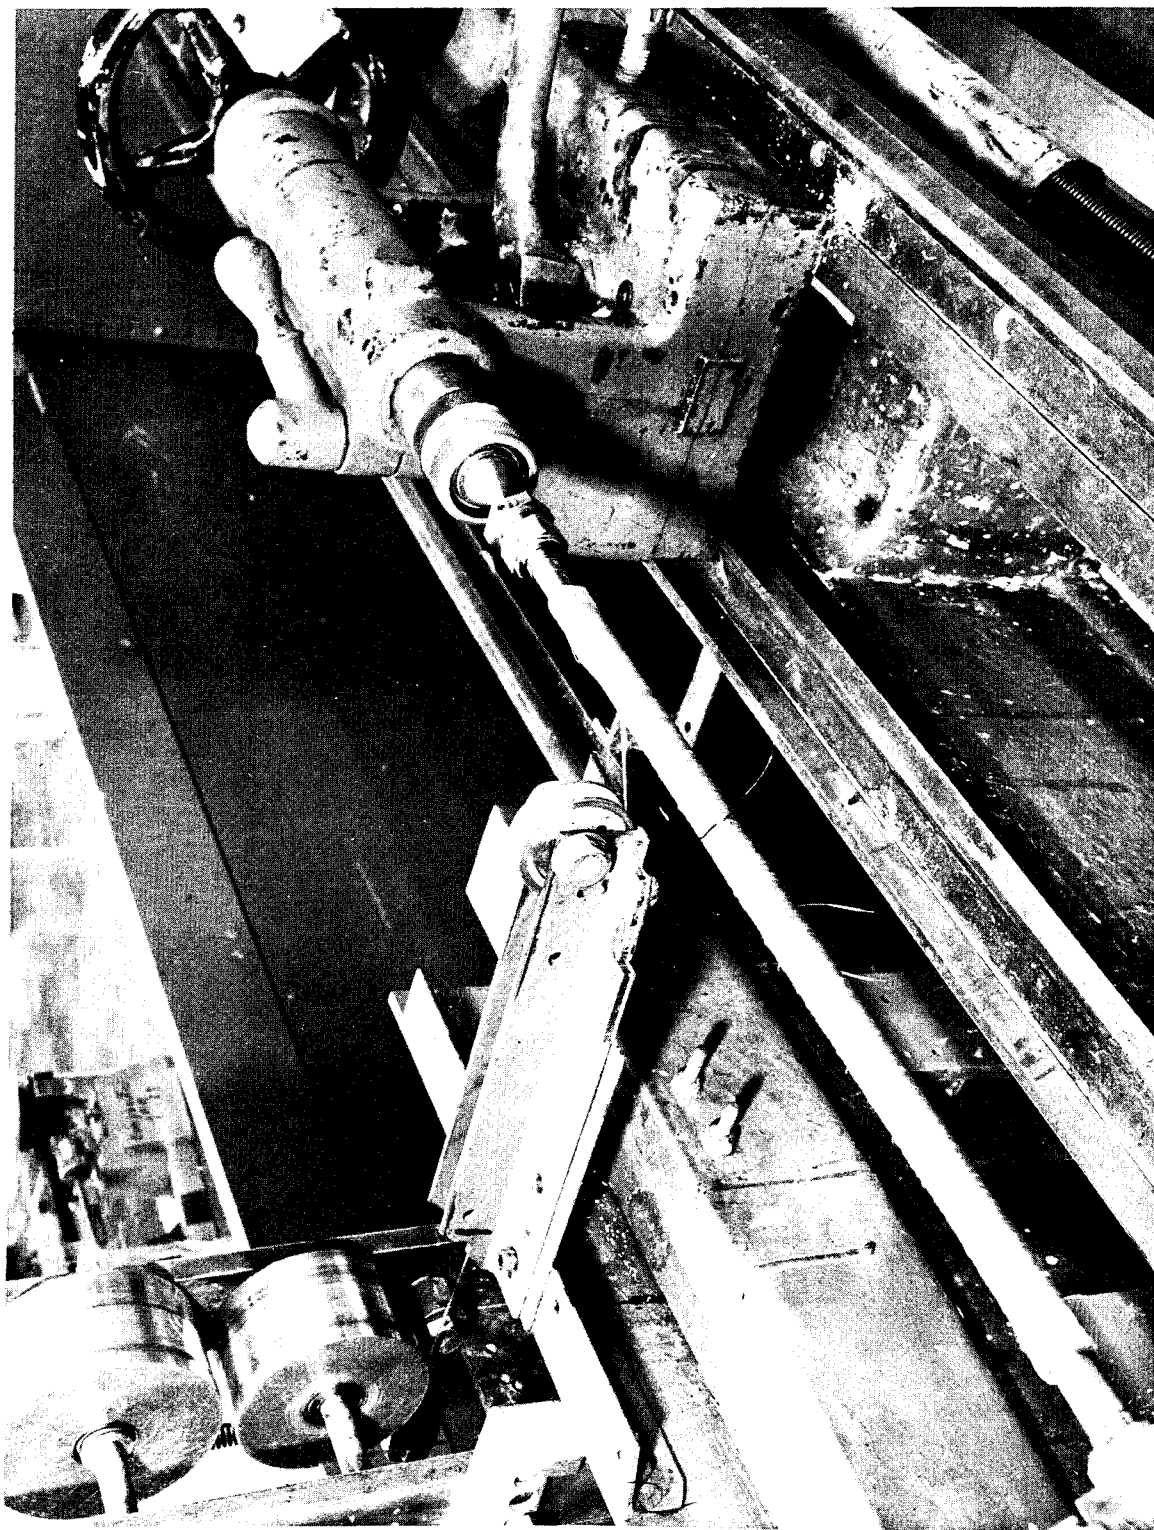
Filament-Winding Machine 1/2 in. (1.27 cm) Diameter Tubes
